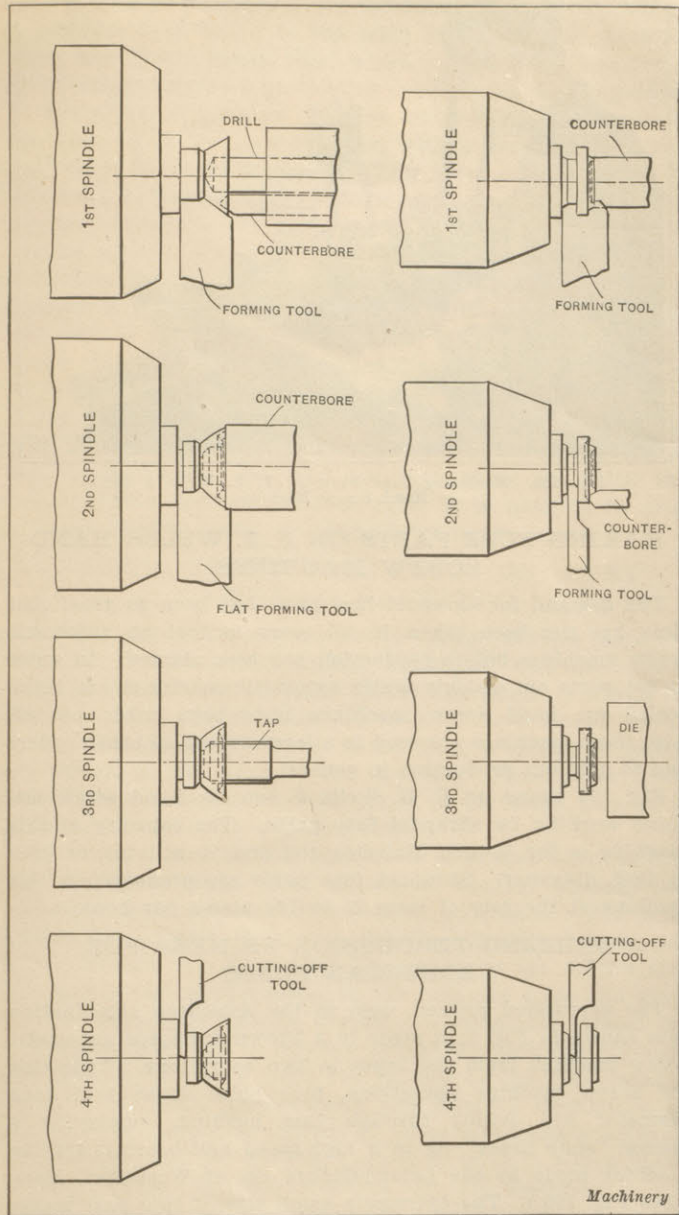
Diagram illustrating Set-ups for machining Closing Cap and Bottom Closing Screw on "Gridley" 1 3/4-inch Multiple Spindle Automatic
